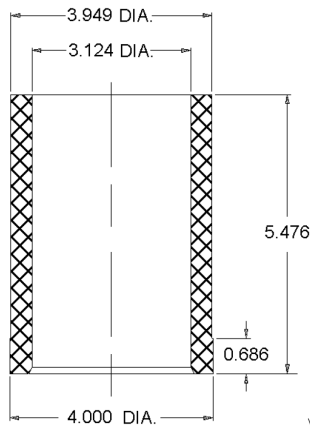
Tri Ring Tool (for W71 / W73 and W72RS Valves)
